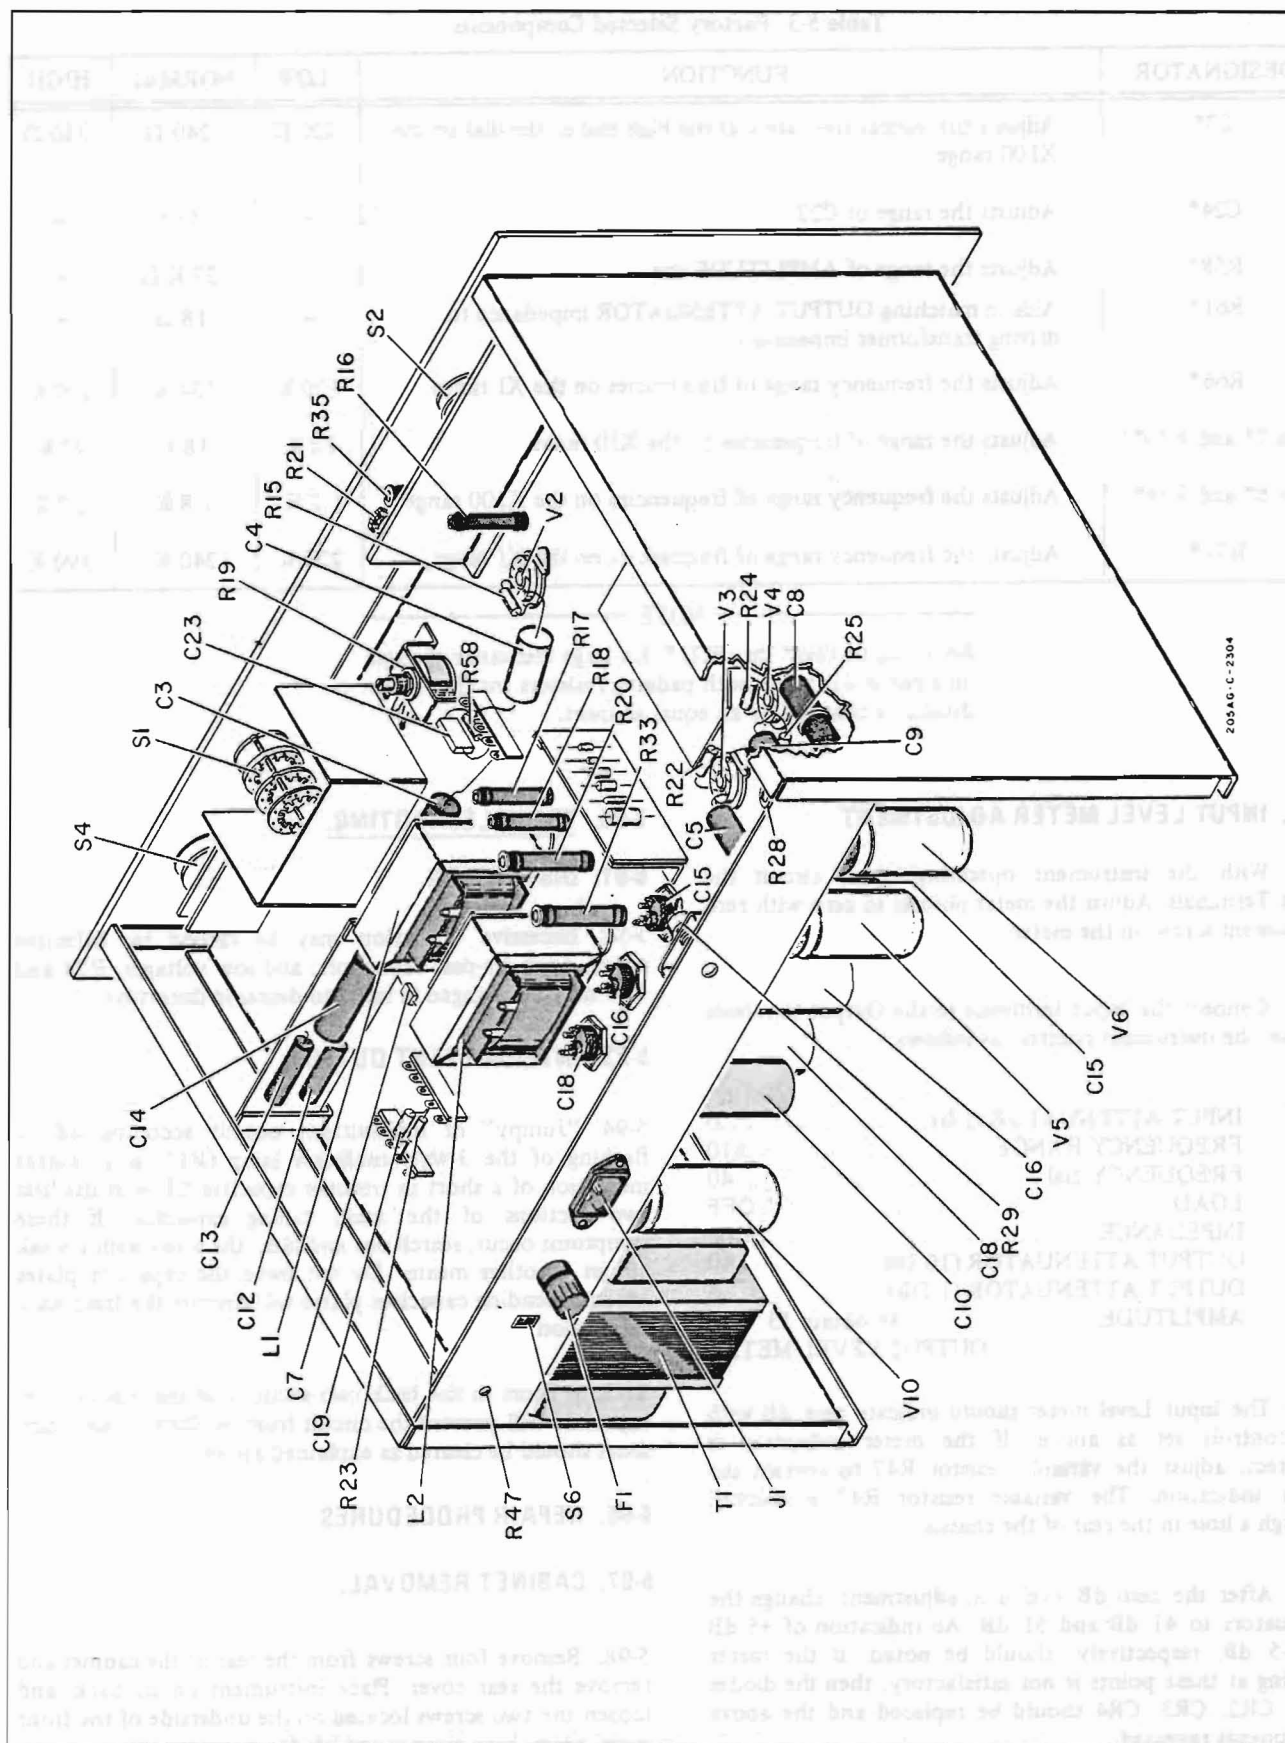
Adjustment and Chassis Component Location (Bottom View)
